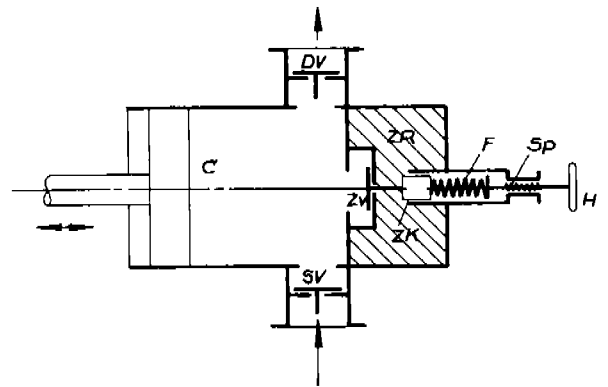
Schematic of a stepless clearance volume regulation; C = piston, SV = suction valve, DV = discharge valve, ZR = clearance pocket, ZV = clearance pocket valve, ZK = unloader piston, F = adjustable spring
